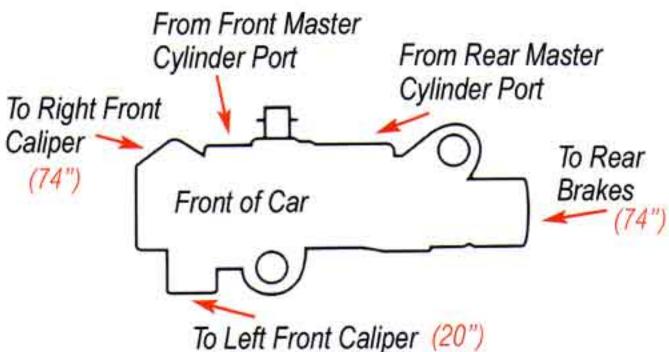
& Diagram 1: The brake lines may now be run to the front and rear wheels. These lines are not prebent so you may bend them as you wish. Use a piece of coat hanger to bend a template for each brake line routing. This will keep you from bending and re-bending the new lines. A good tubing bender #49-38 will come in handy. Here is how each line should be run: 74" line with small fittings from front of proportioning valve across front crossmember to right front drum brake hose, 74" line with one large and one small fitting from rear of proportioning valve across front crossmember to union at rear brake line on right side below firewall 20" line with small fittings from bottom of proportioning valve to left front brake hose.
